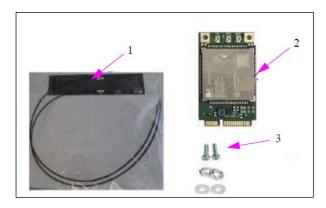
Cellular Modem Module Assembly Parts (4-5)
